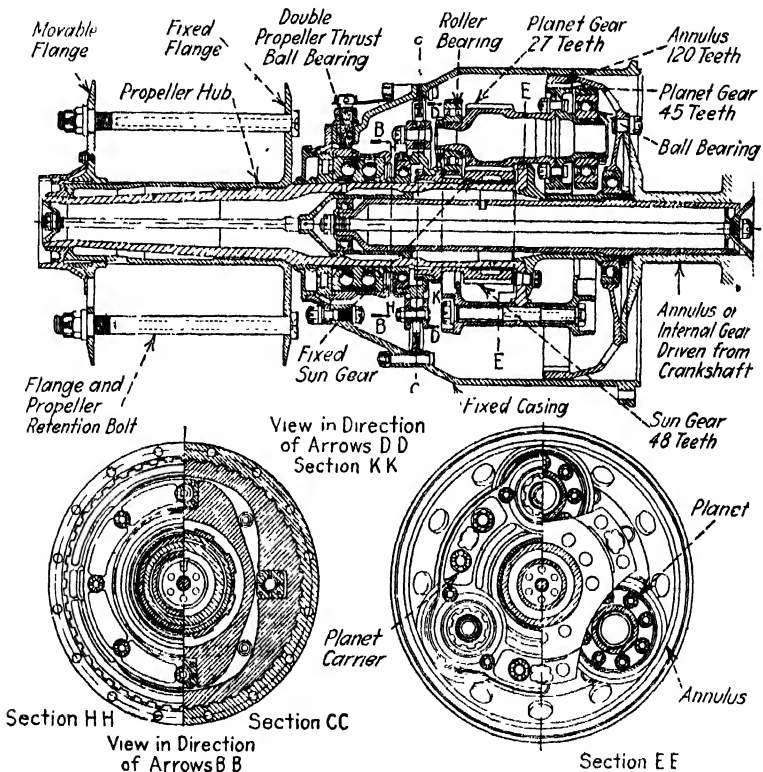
Diagrams Showing Rolls-Royce Epicyclic Speed Reducing and Propeller Drive Gear.
